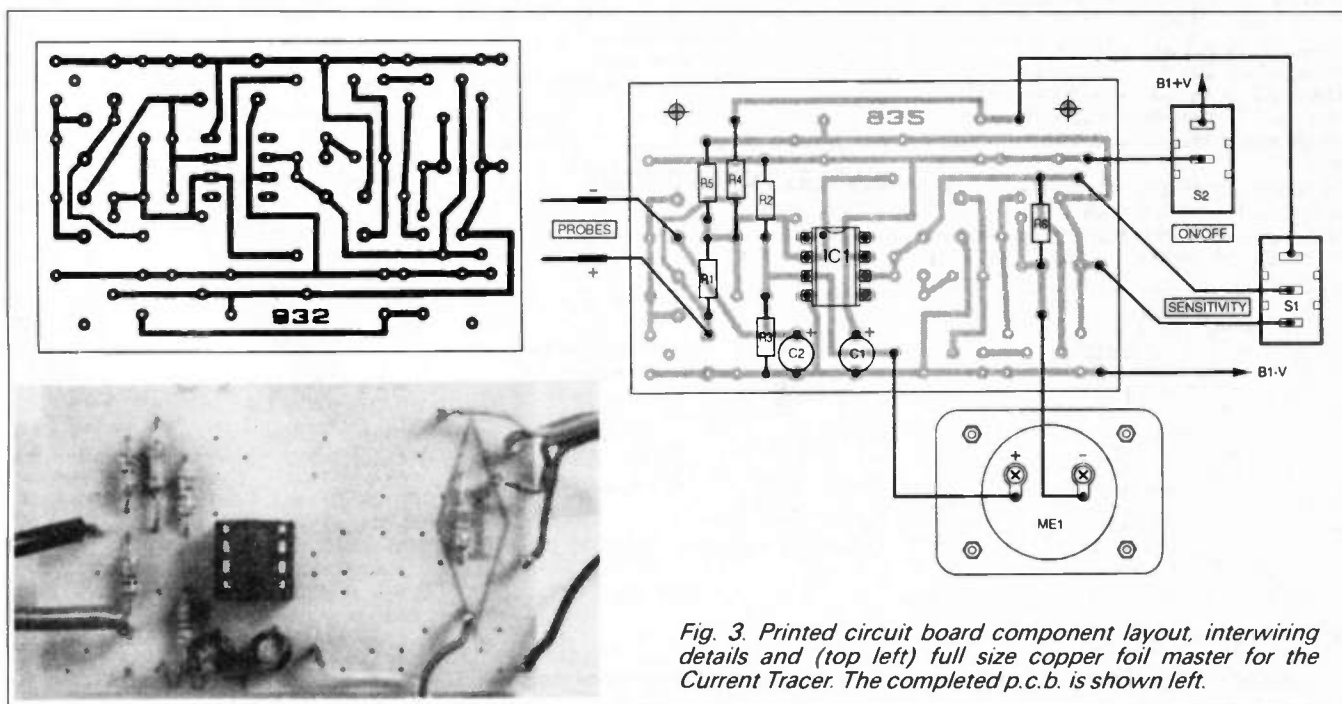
Printed circuit board component layout, interwiring details and (top left) full size copper foil master for the Current Tracer. The completed p.c.b. is shown left.
